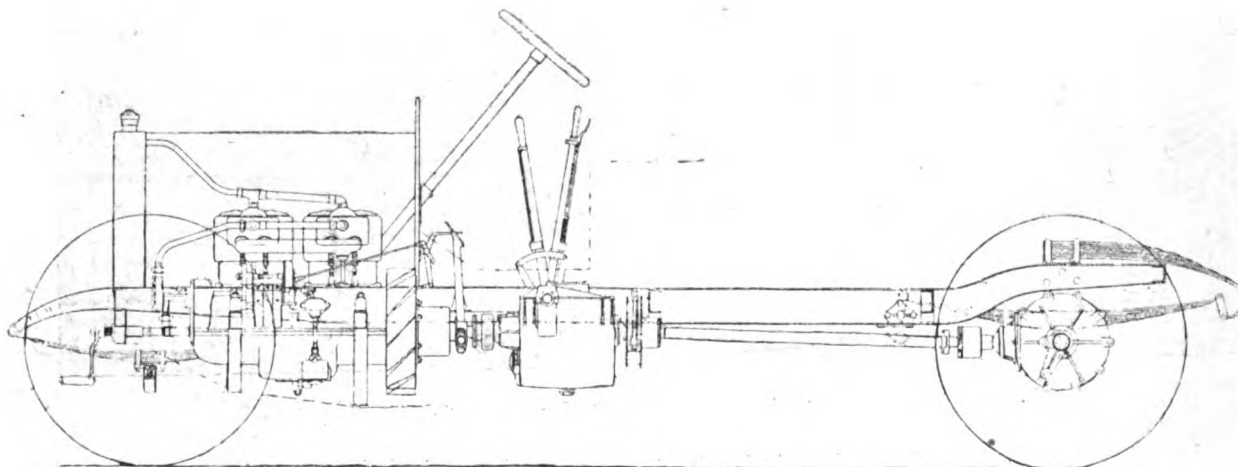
Chassis of Unic 24-30-h.p. Car.
